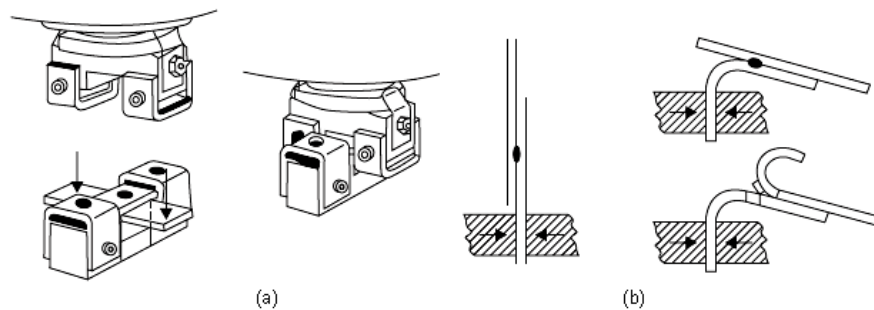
Test jig for cross-tension specimens ($t > 4.8$ mm)
